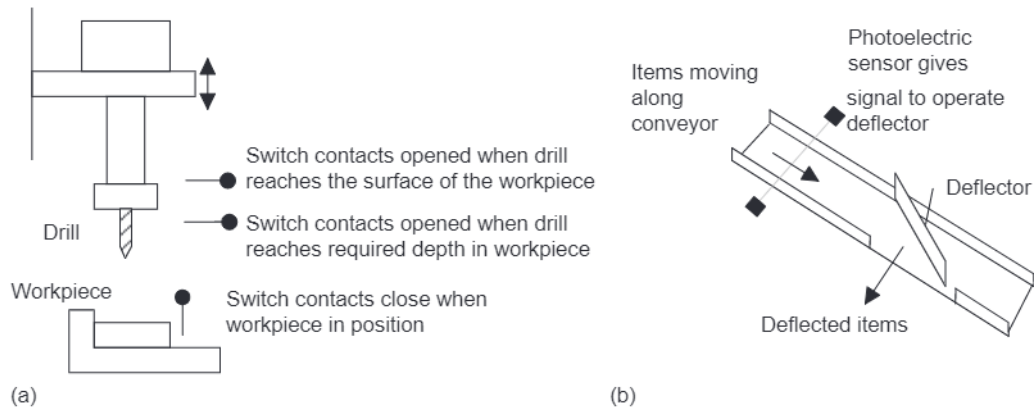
An example of a control task and some input sensors: (a) an automatic drilling machine; (b) a packing system.
